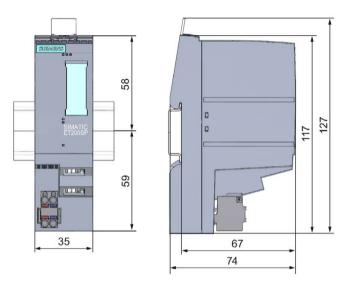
Dimension drawing of the IM 155-6 PN BA interface module (front and side view)
